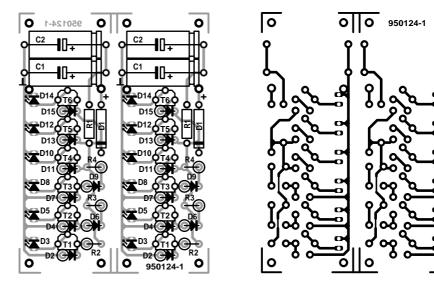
The printed-circuit board for the passive VU meter must be cut into two before any assembly work is begun.
